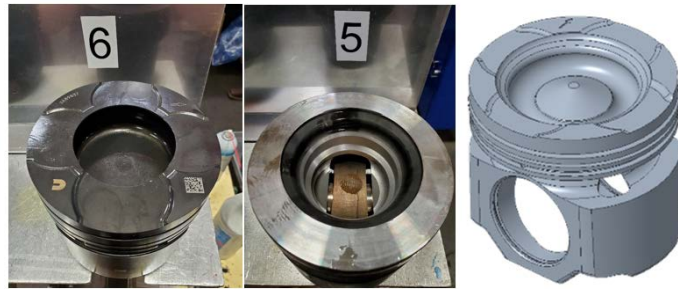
Piston comparison X15 SCE. Right, single cylinder engine spark ignition baseline piston installed in cylinder #6. Center, dummy hollow pistons in cylinders #1 - 5. Right, original diesel X15 piston.
